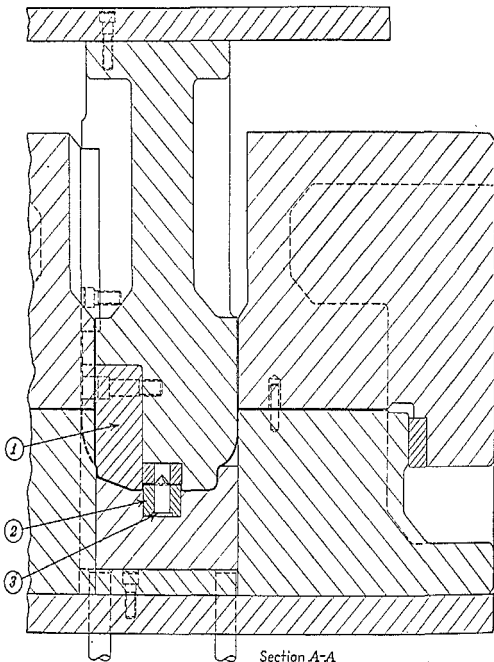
Die to draw a cylinder-head cover. (Chrysler Corp.)
